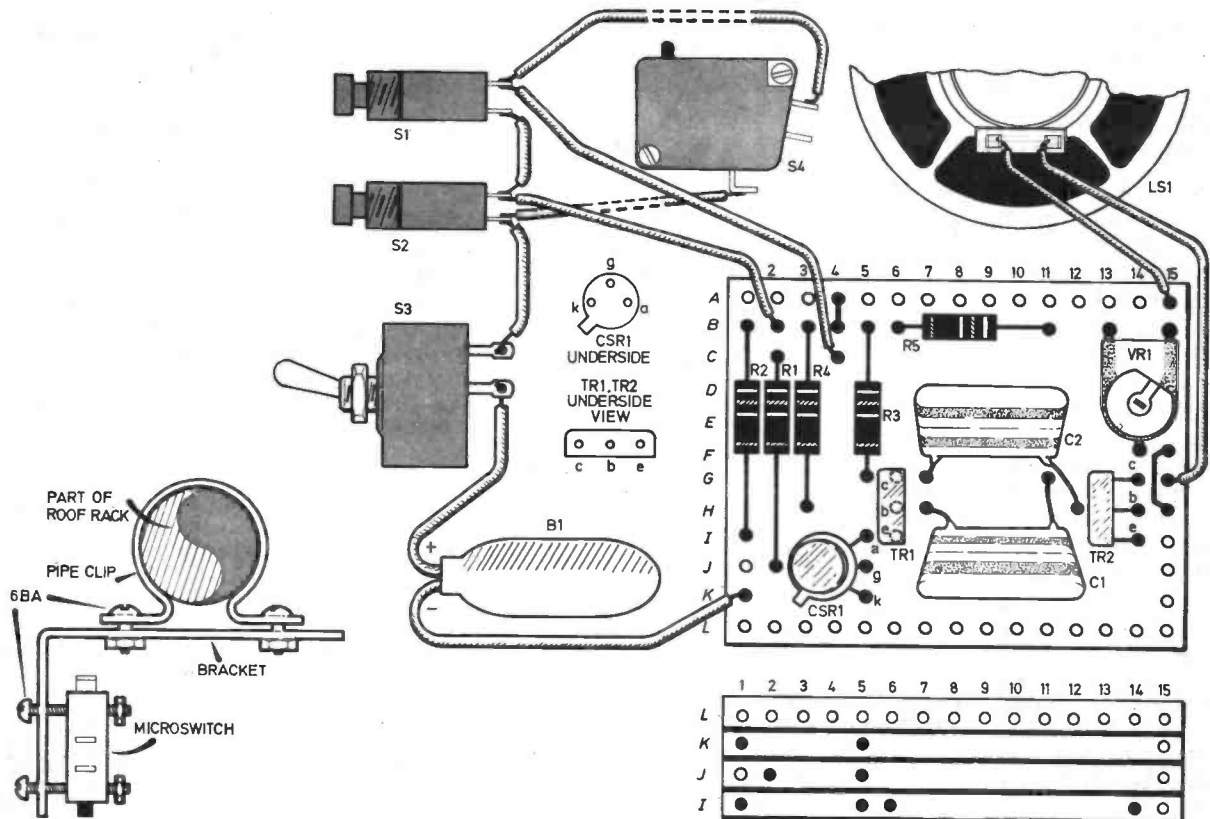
Wiring details for the unit. Also shown is the stripboard layout and underside view.
